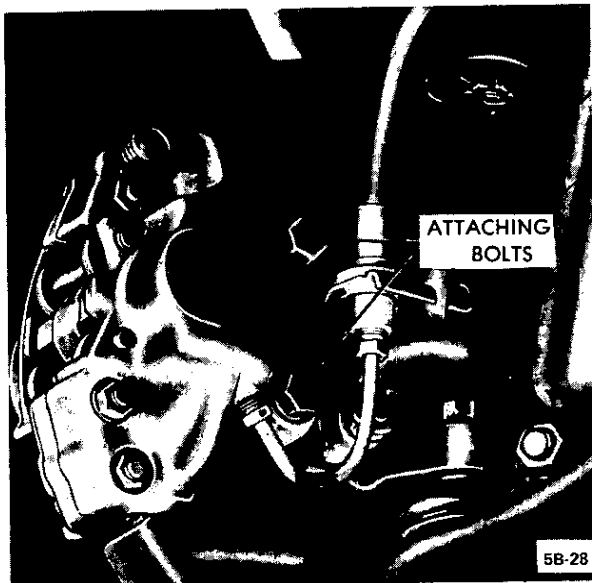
B-28 Brake Caliper to Steering Knuckle Attaching Bolts
